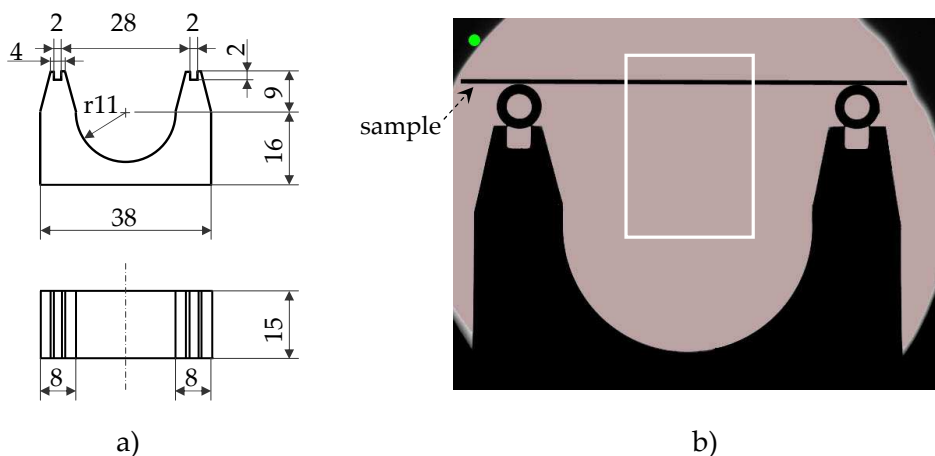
Sample setup for the cycling unloading measurement: a) sketch with side and front views and b) projected image taken by the optical dilatometer
